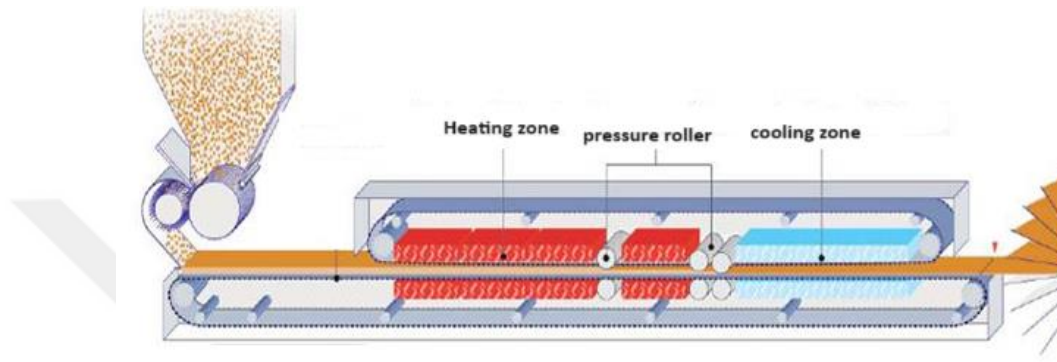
Continuous Pressing Machine for Sheet Production [42]
